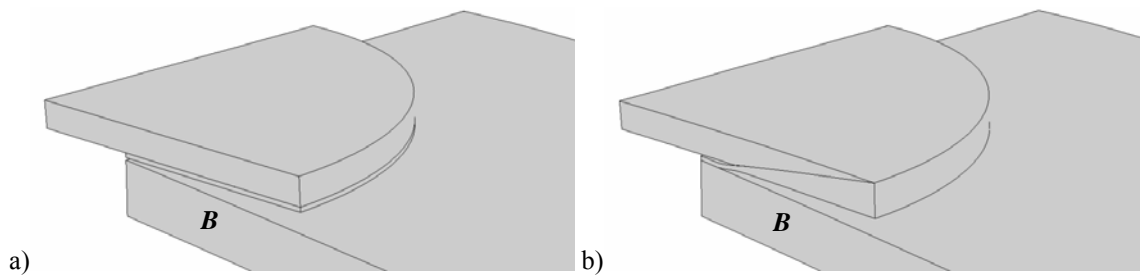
Deformed shape of the standard (a) and 1.2 mm patch inner chamfer (b) repairs (compressive load).
